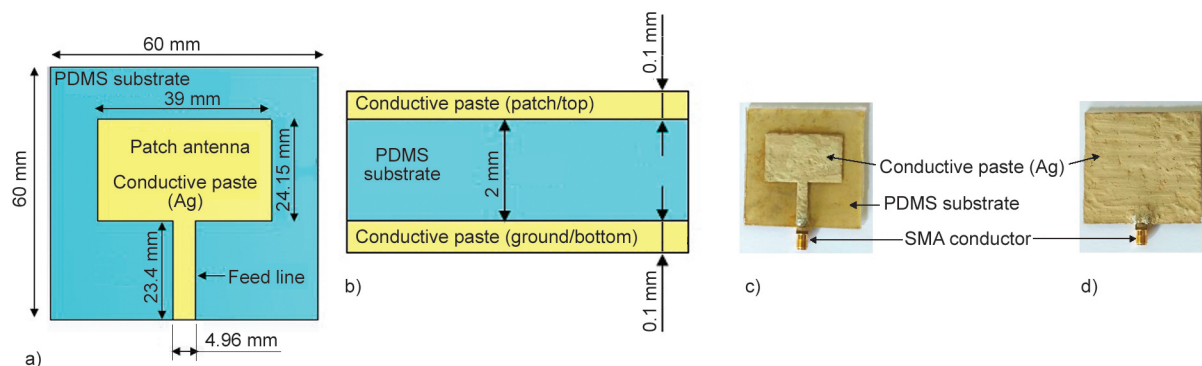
Dimension and prototype of the rectangular patch antenna: a) top view dimension; b) side view dimension; c) top view patch antenna (prototype); and d) back view ground plane antenna (prototype).
